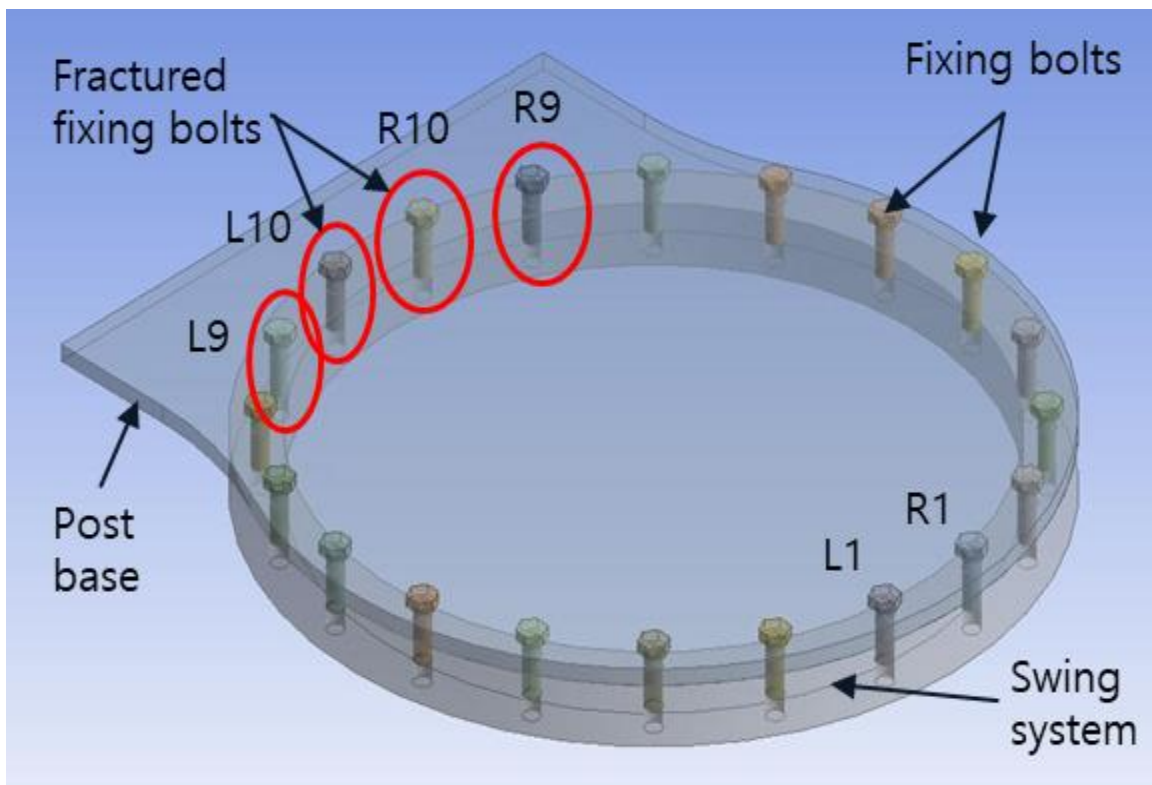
The set of 20 turntable fixing bolts and 4 fractured bolts
